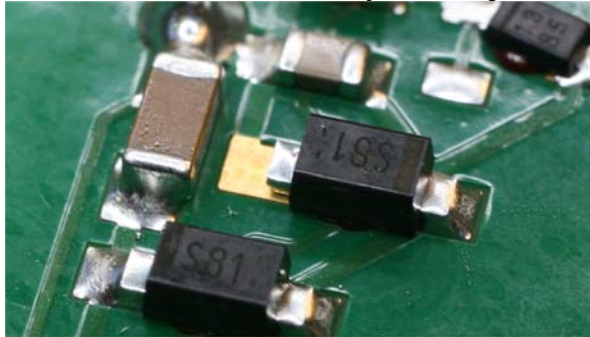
Solder skip shadowed by adjacent component and having too small pads for good solder ability.
